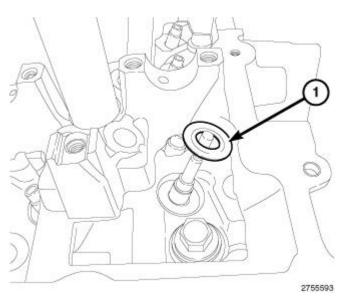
Valve Guide Seal & Valve Seal Tool Courtesy of CHRYSLER GROUP, LLC
